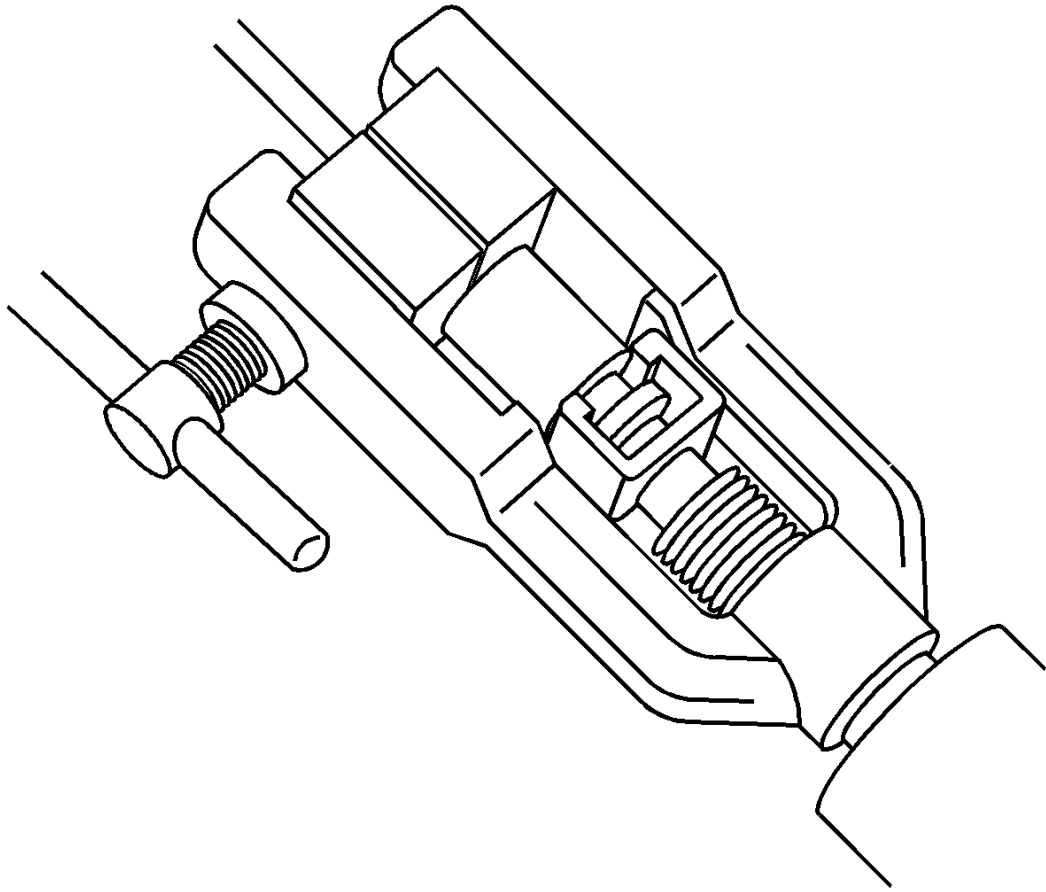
Bottoming Forming Mandrel Against Clamping Dies Using Pipe Flaring Tool
